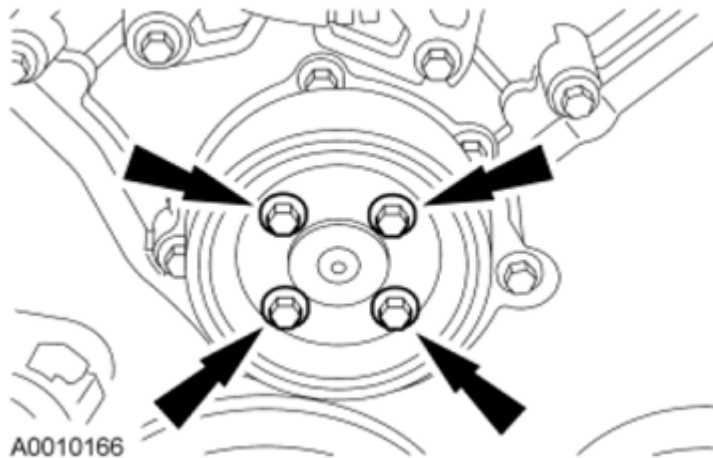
Locating Coolant Pump Pulley Mounting Bolts
